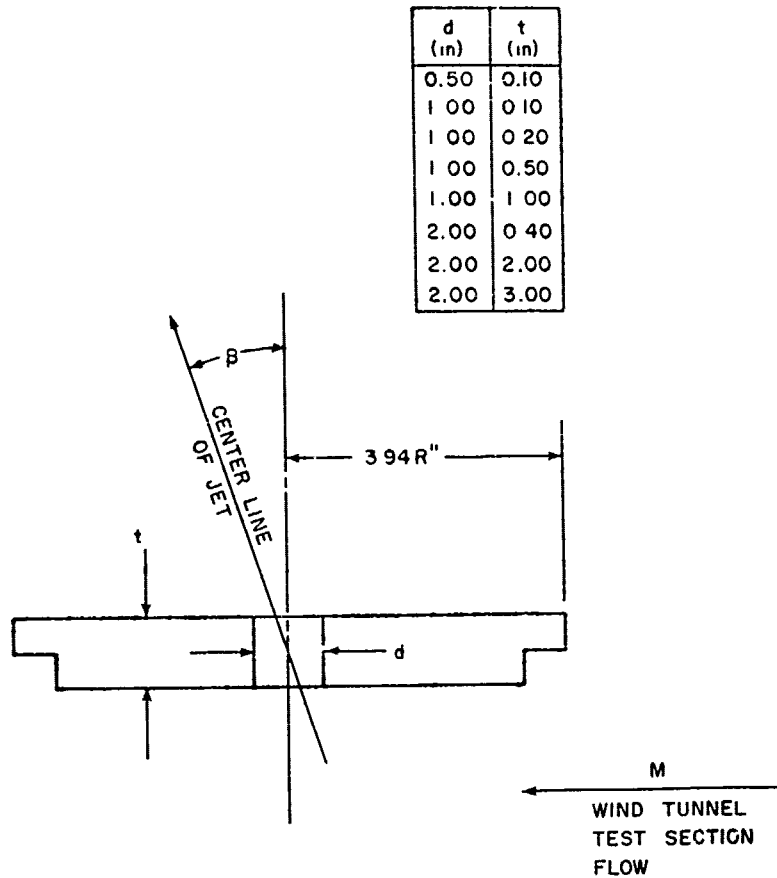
INSERT PLATE FOR PIERCED WALL TEST BOX
